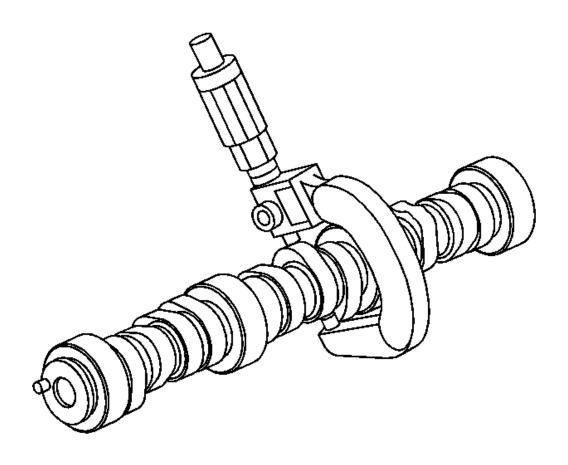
Measuring Camshaft Lobes Courtesy of GENERAL MOTORS CORP.
